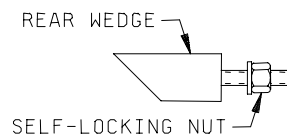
Screw retaining self-locking nut (corrosion resistant) details.
